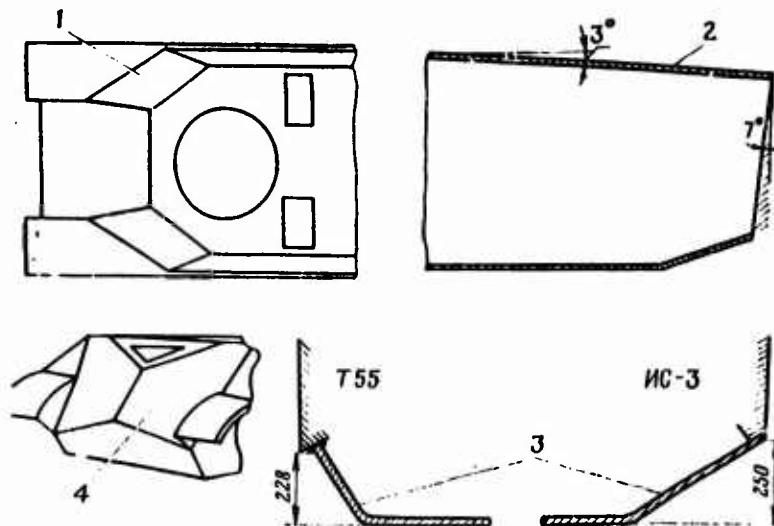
Making Welded Hull Shapes More Efficient
